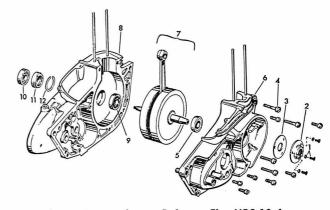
Exploded view of the engine crankcase. Refer to Fig. HD2-10 for an exploded view of the flywheel and connecting rod assembly.
